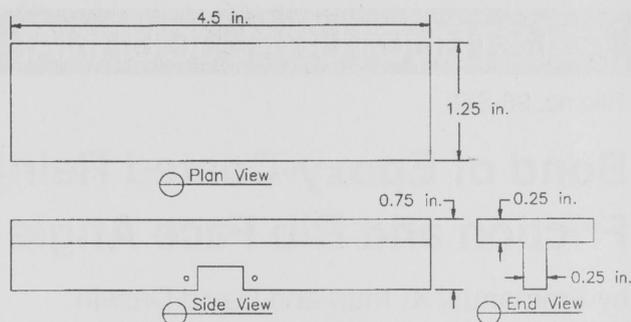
Steel yoke for mounting reinforcing steel specimen (1 in. = 25.4 mm).
